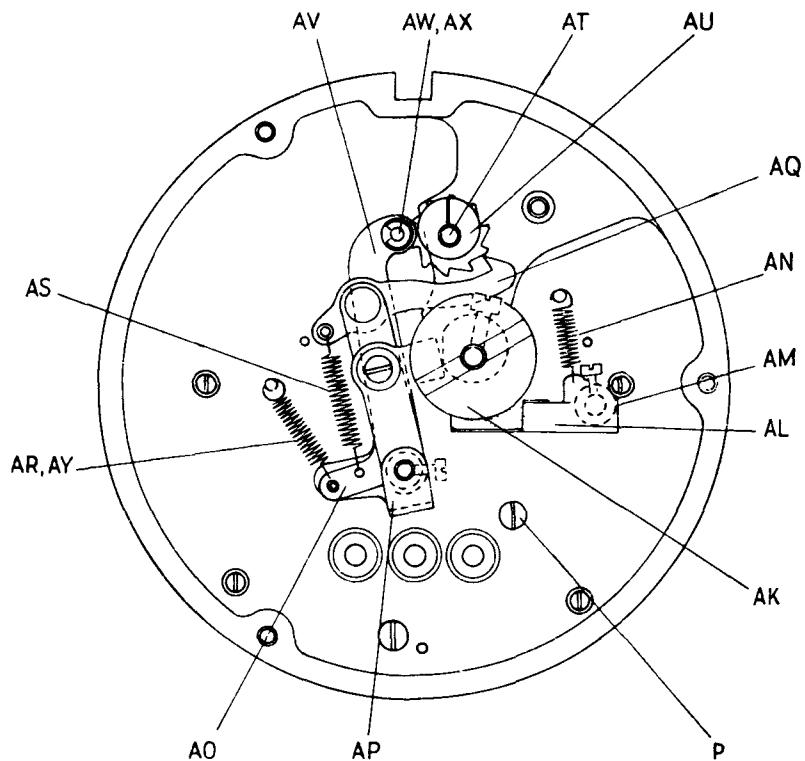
TRANSMITTER HEAD C.P. (REAR VIEW)
